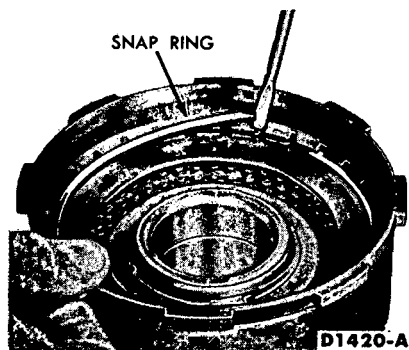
Removing Reverse-High Pressure Plate Snap Ring
